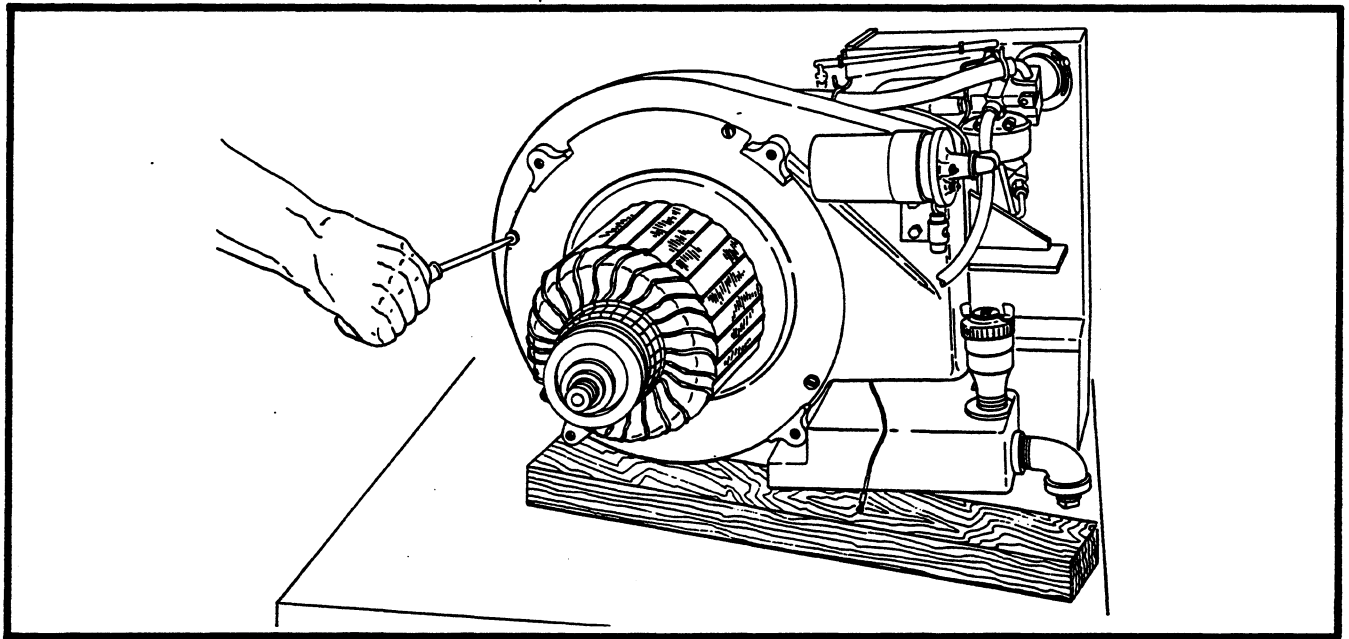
REMOVING AIR BAFFLE FROM FAN HOUSING
